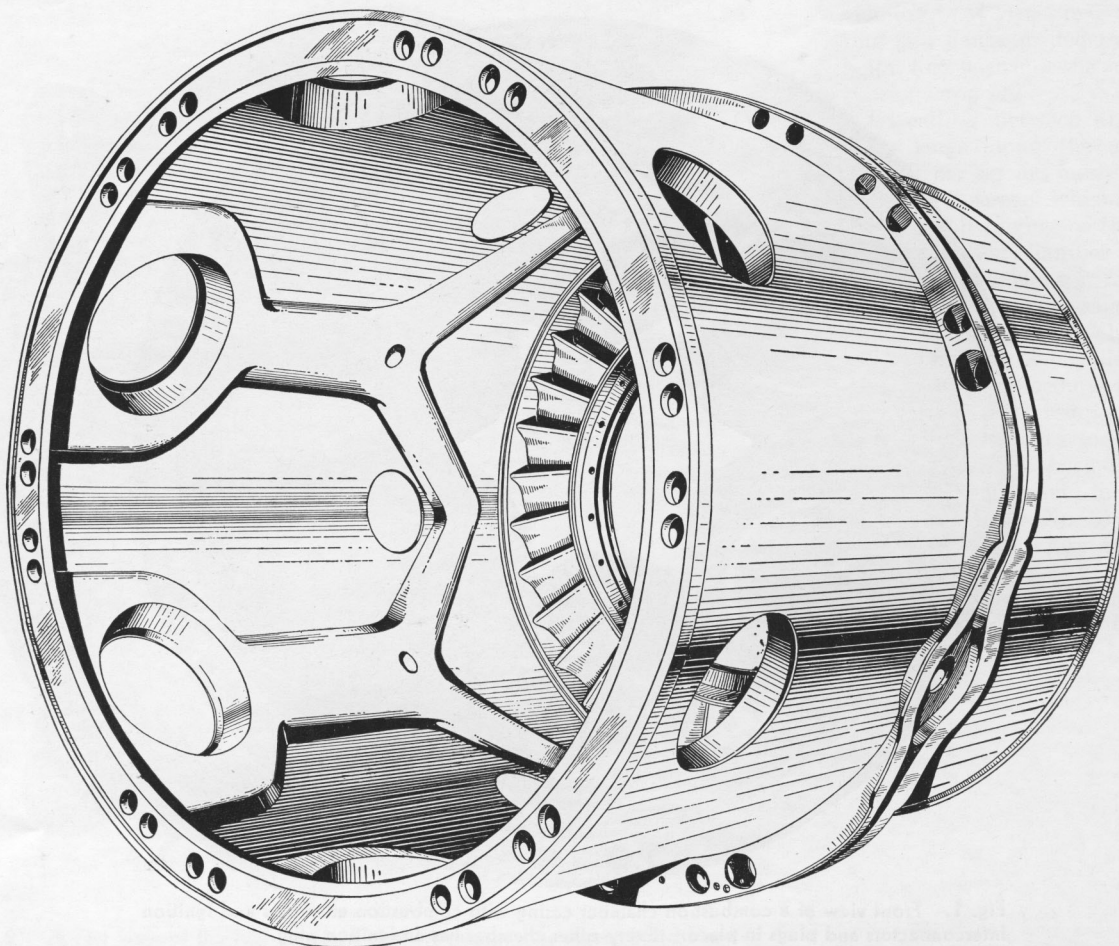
Mild-steel double-skinned casing surrounds the combustion chambers. Holes in the front ring carry cooling air into ducts between the two skins. Access holes lead to the combustion chamber ignition plugs and interconnectors. A heavy transverse ring around the outside of the casing carries tie-rod braces into the main casting and serves as an attachment for the aft-engine pickup point.
